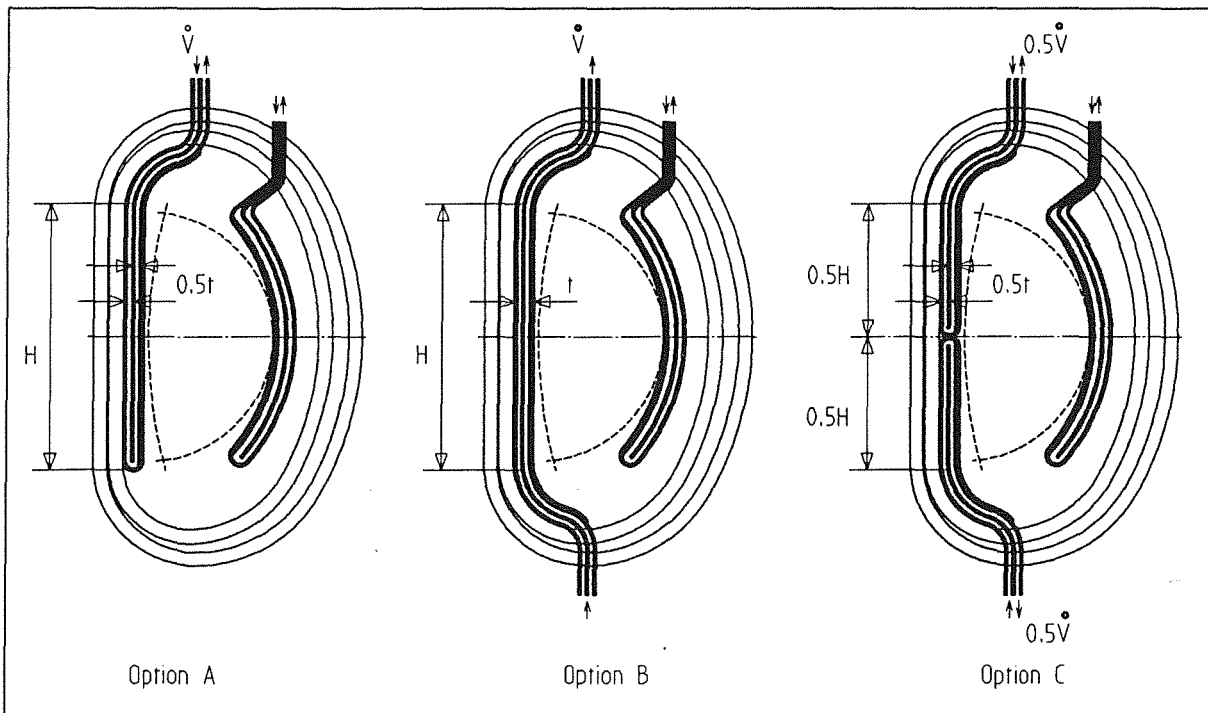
Arrangement of coolant supply tubes to the inboard segment
